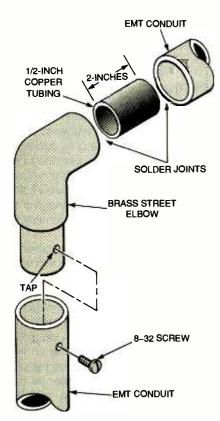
Only one end of each EMT conduit used in the reflector frame is soldered. The other ends connect with screws to the brass elbows, making the frame easy to disassemble.
